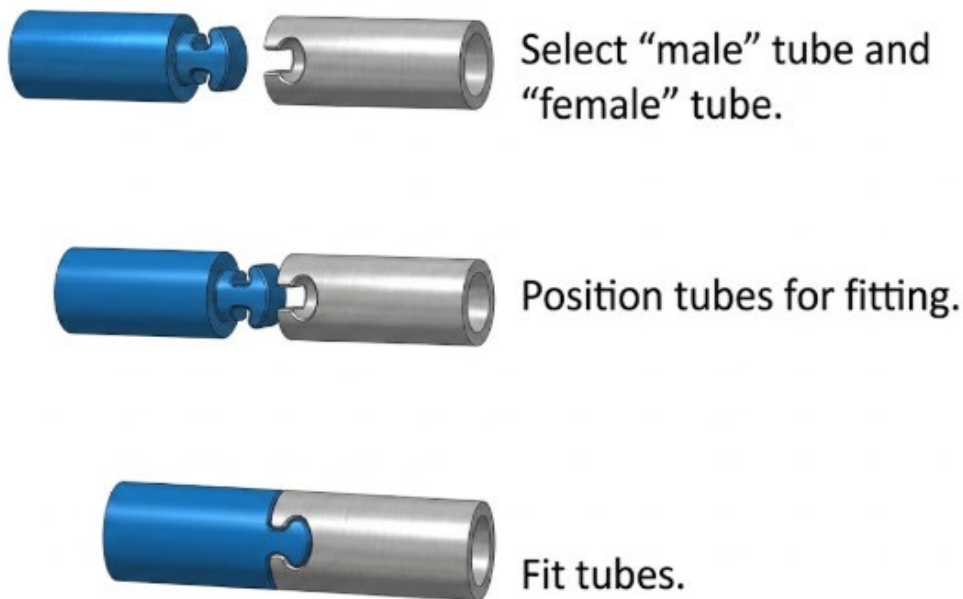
| Fitting of the pair of tubes without using a welding point
